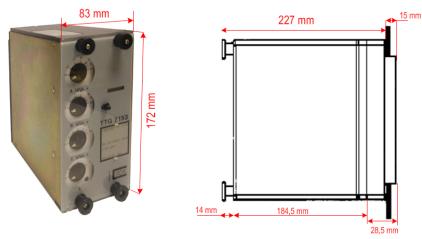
Relay 7000 - Case SDPAR R2 - Outside dimensions
